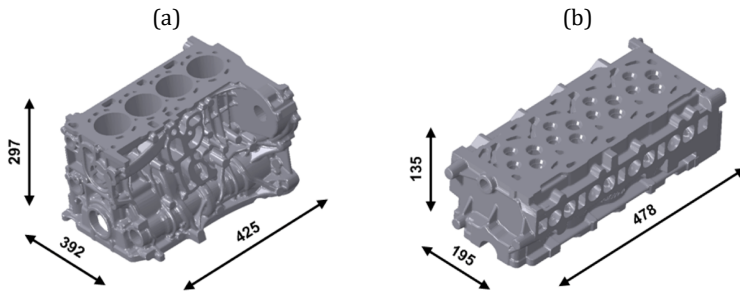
Geometric measures of the two industrial castings used for the specimen extraction and analysis: (a) crankcase and (b) cylinder head (dimensions are given in mm) (216)
